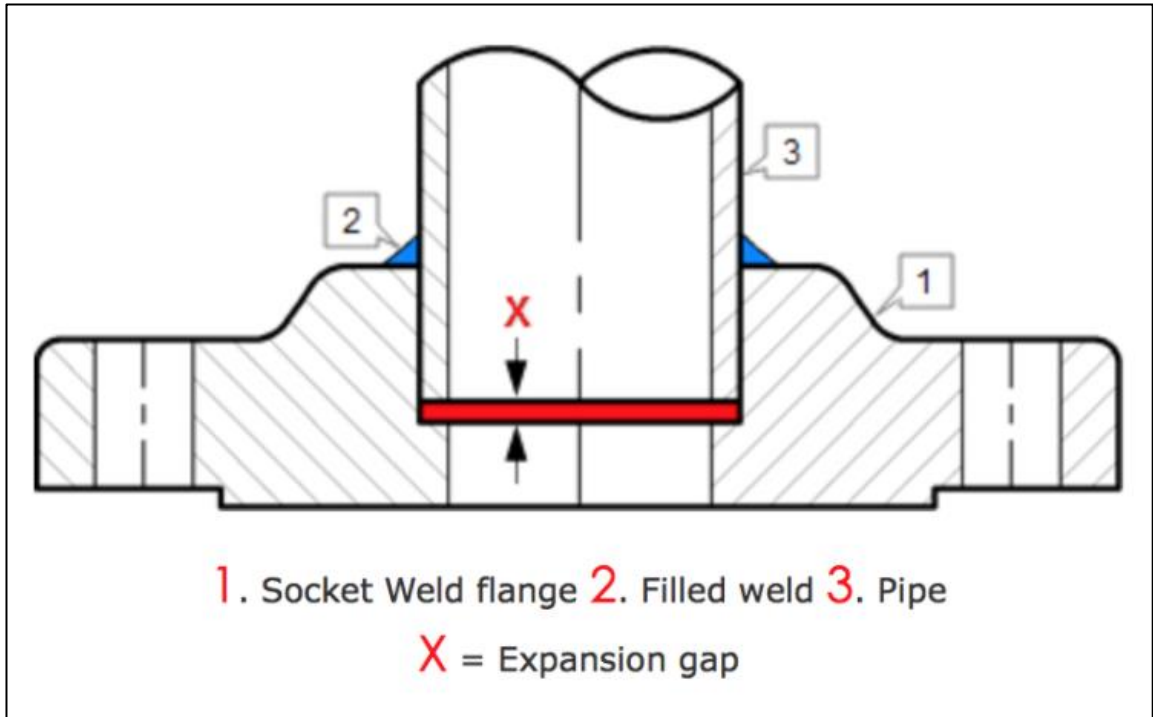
Section view of Socket weld Flange (Image Reference: theprocesspiping.com)
